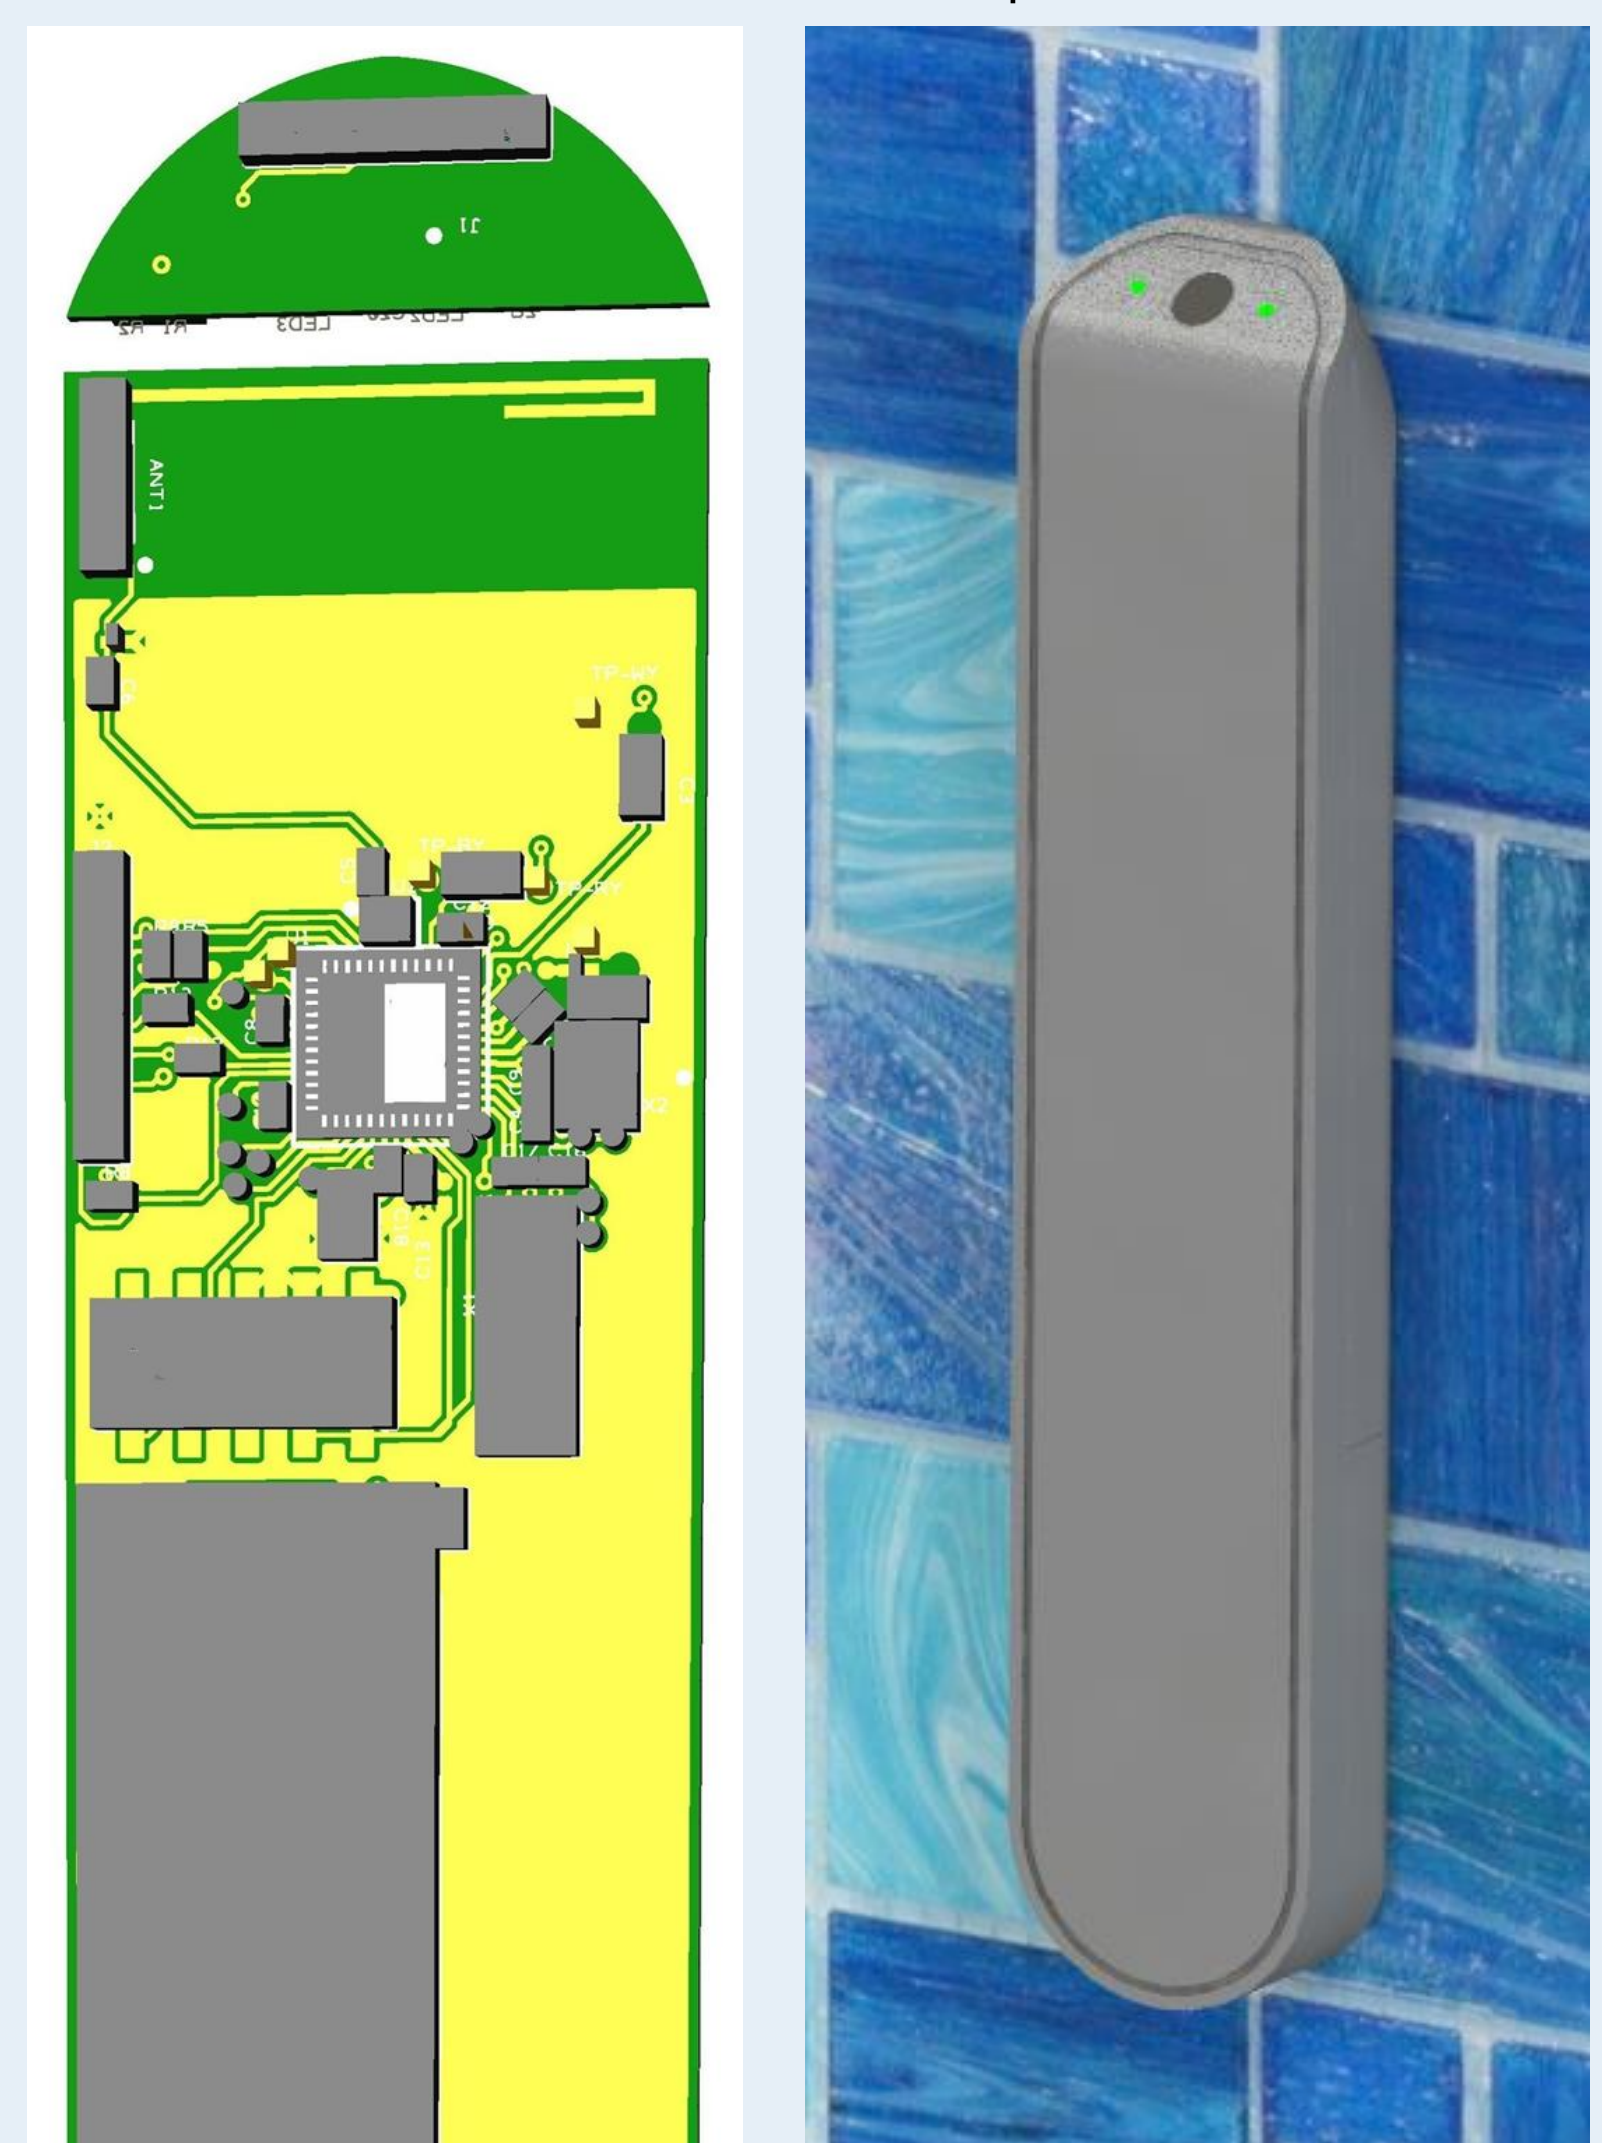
Detail of PCB Layout of Poolside Sensor Unit (left)
